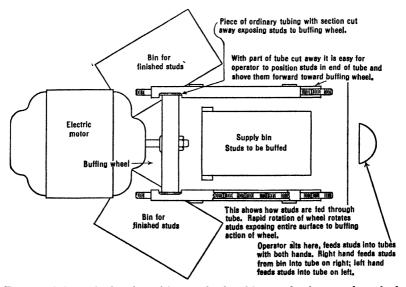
Schematic drawing of layout for brushing studs-improved method.
